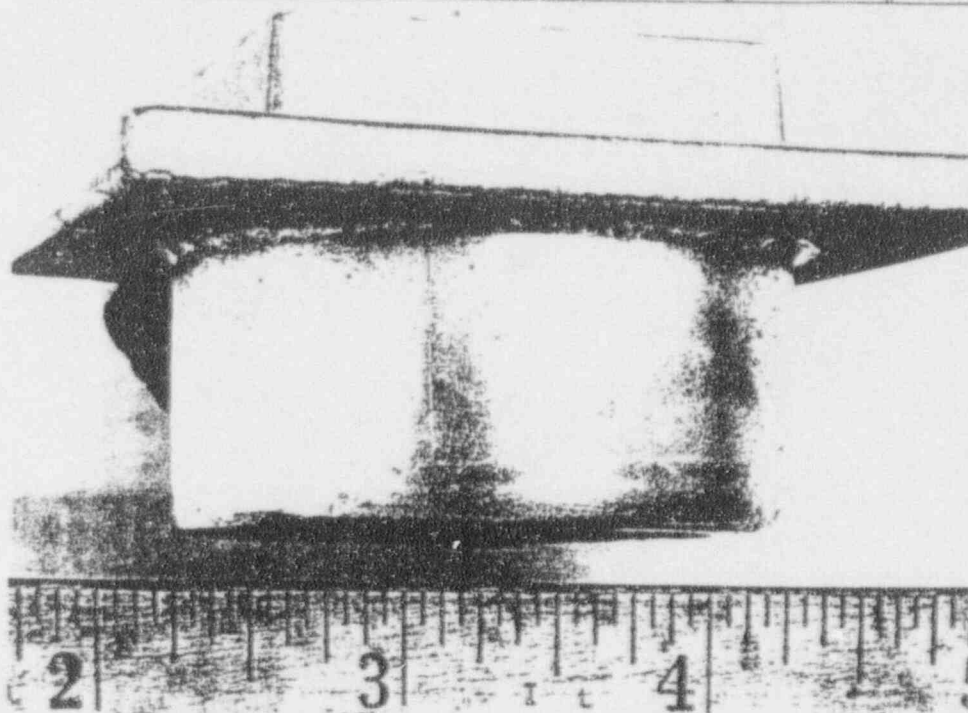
Vertical crack in outer shield of relay, as received. Portion of crack near solder joint is filled with solder. Ma-2513.
